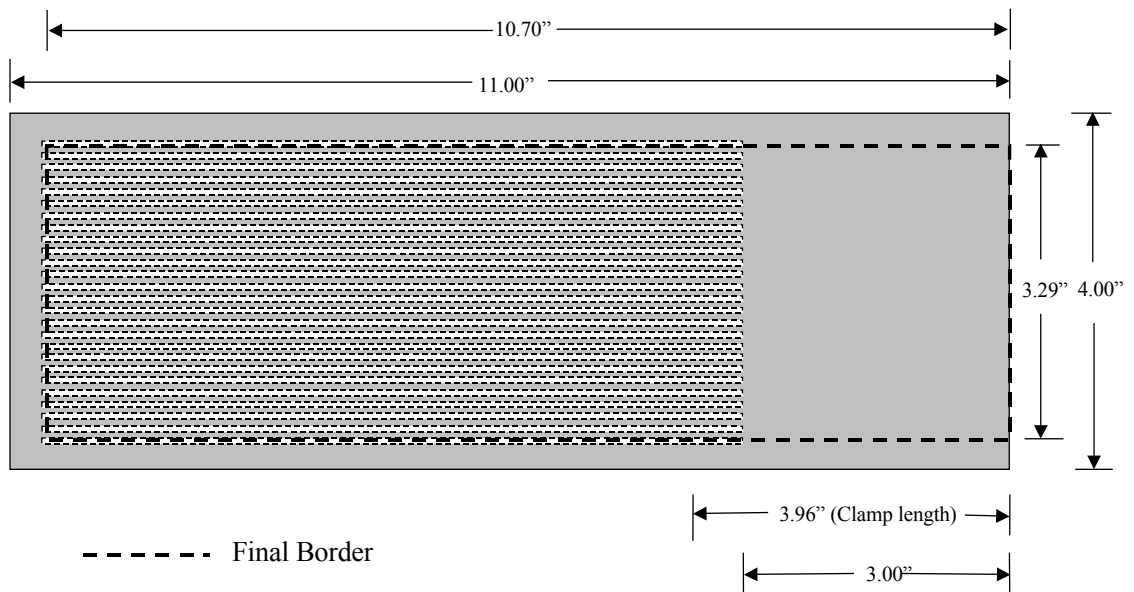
Assembled dimensions and dimensions after final cut (- - -) of sample with acrylic directional damping layer (slots filled with Dow Corning Sylgard® 182 elastomer and Sylgard 527® dielectric gel) and polycarbonate outer layers.
